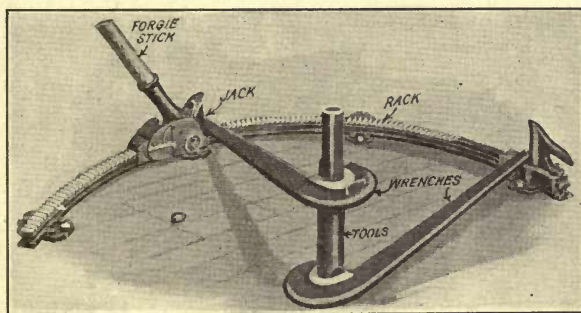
Circle, jack, and wrenches for setting up tool joints.
